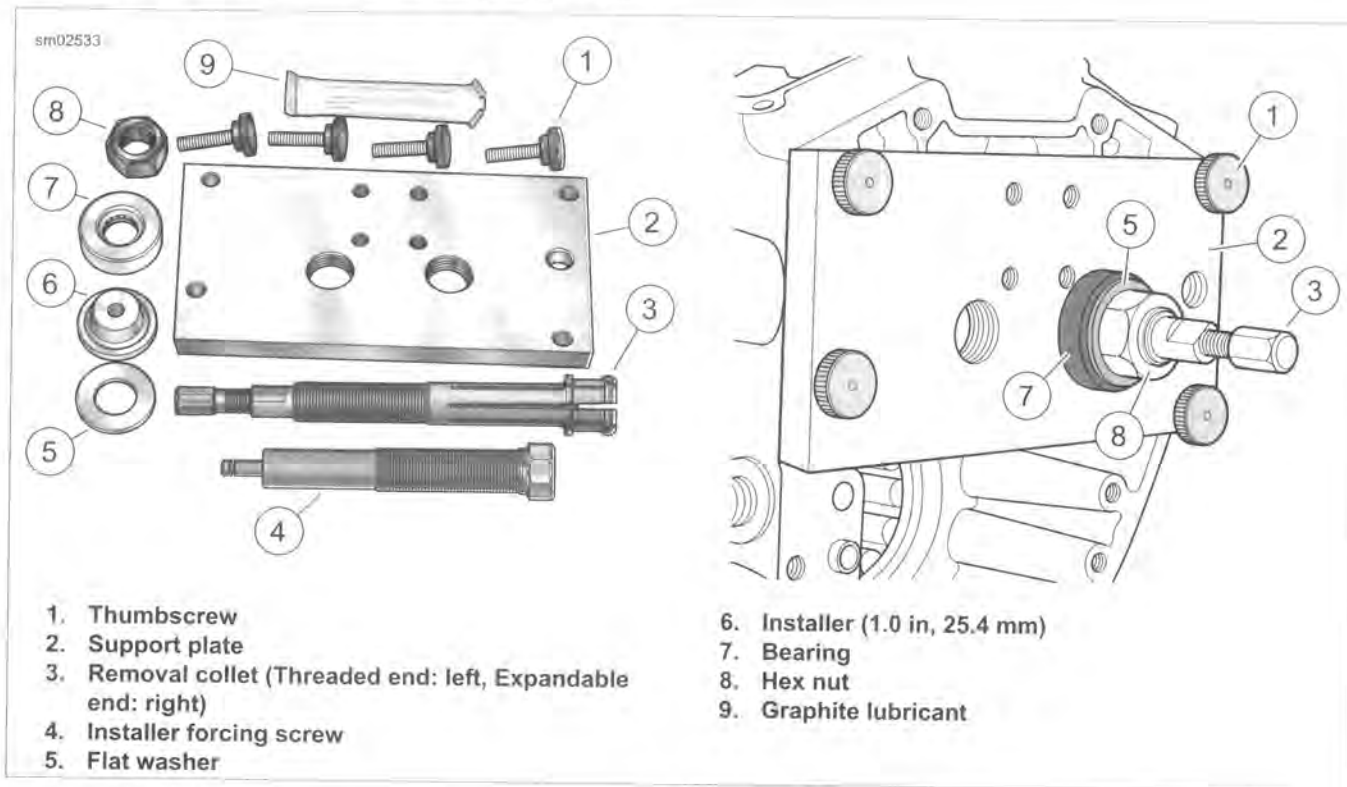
Camshaft Needle Bearing Remover/Installer
